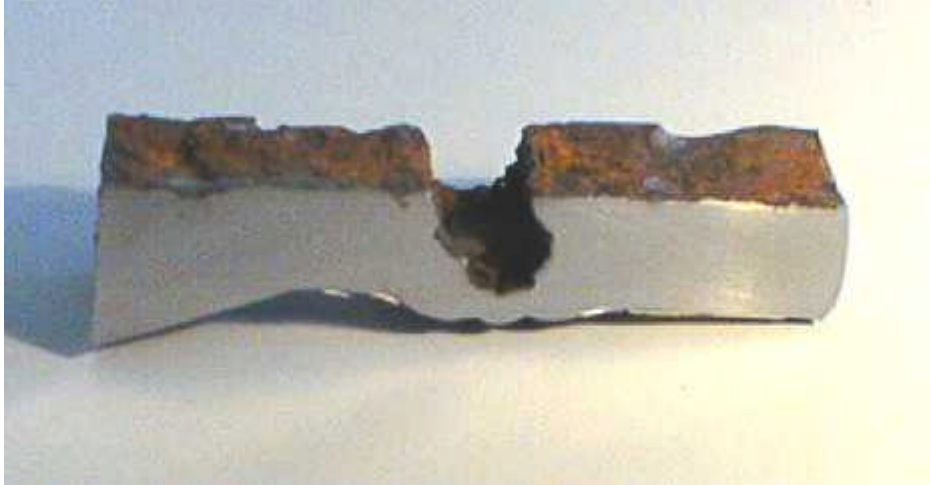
An example of severe preferential weld corrosion in a carbon steel pipeline carrying inhibited oil and gas ⁽¹⁾
